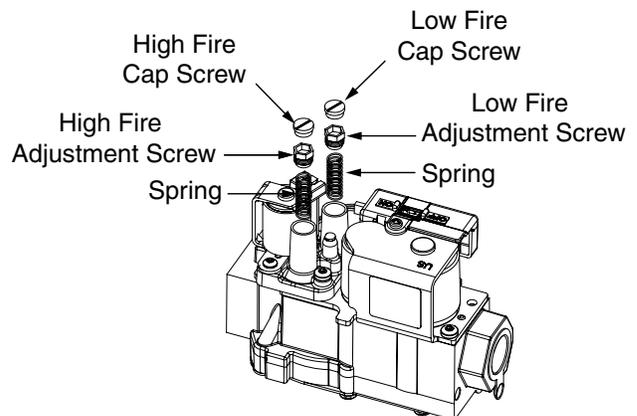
Pressure Regulator Spring & Adjustment Screw Removal
